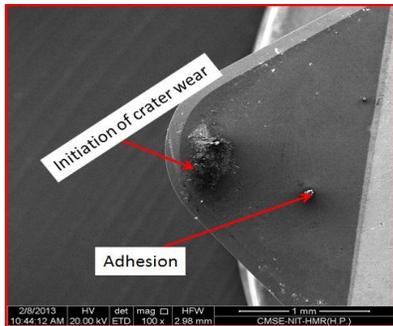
Interrupt machining at 102 m/min and 20 passes
